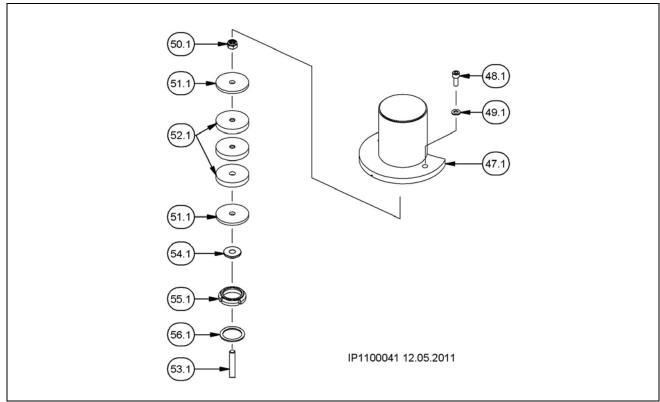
Remove the preload device for RotaCut with manual preload (extract with pos. no. from the current spare parts list RCX-20G)
